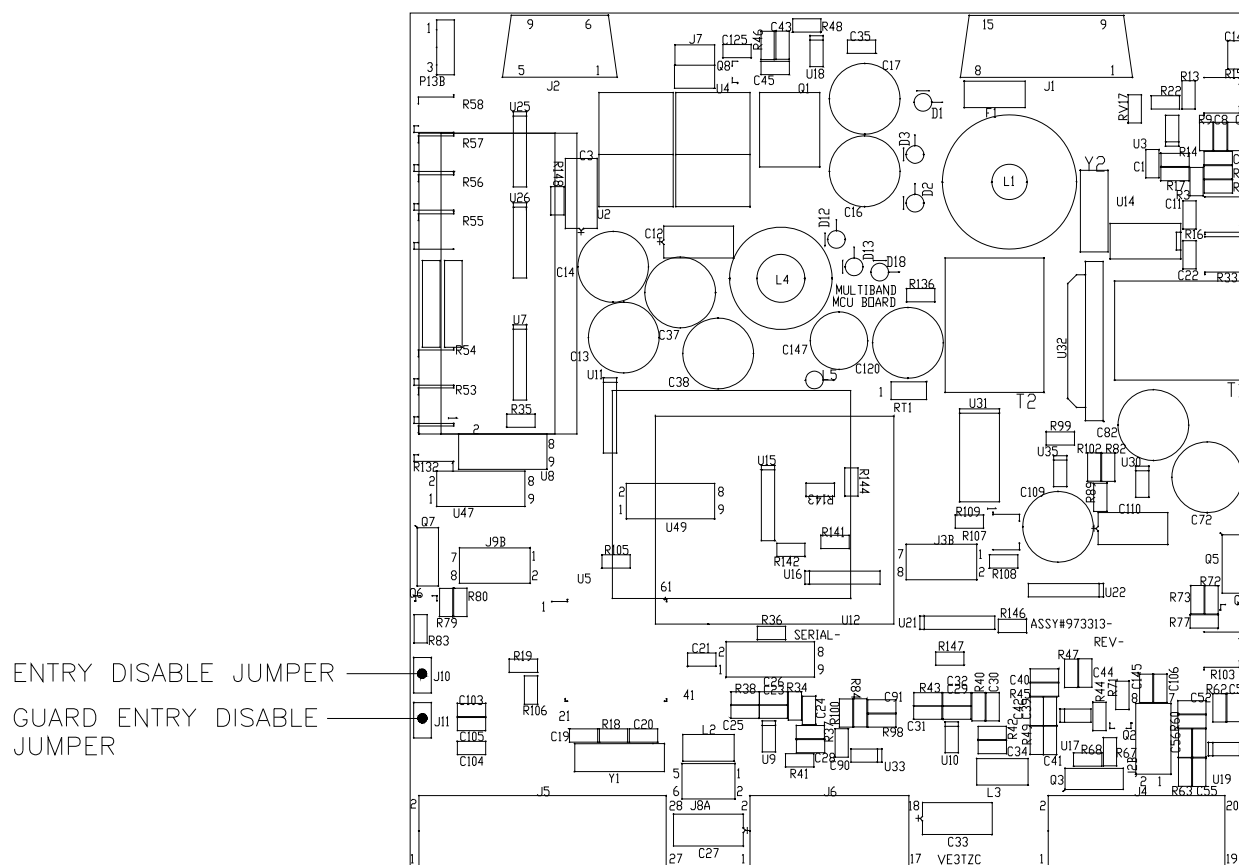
Internal Enable/Disable Jumper Locations
